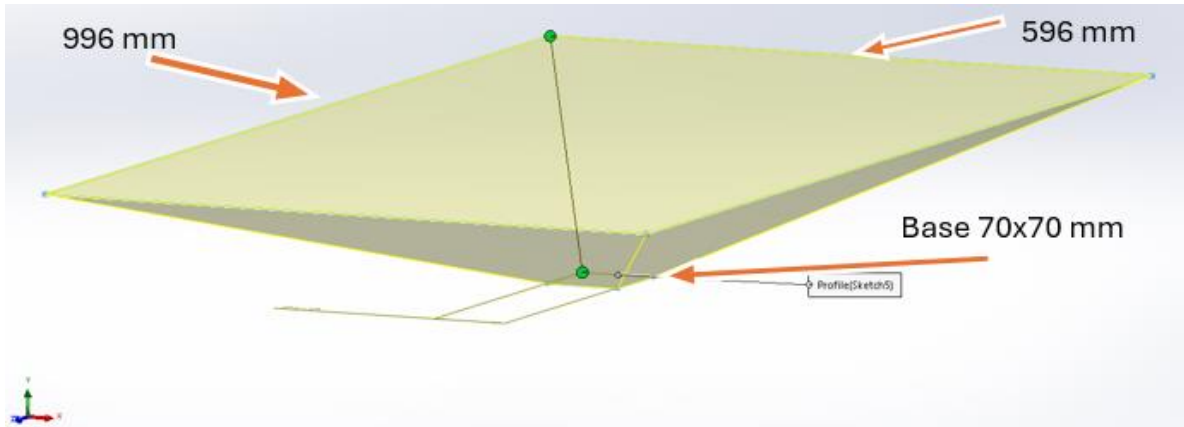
Loft feature from 70x70 mm base to 996x596 mm intermediate profile in SolidWorks.
